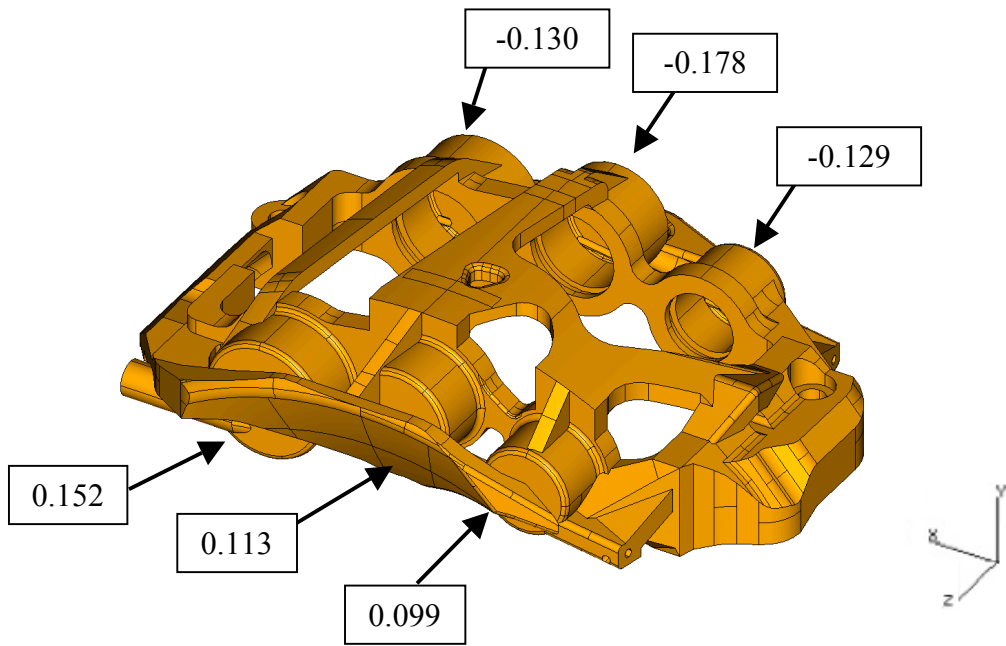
"Full BC" caliper, piston bore displacement in the "z" direction (mm)
